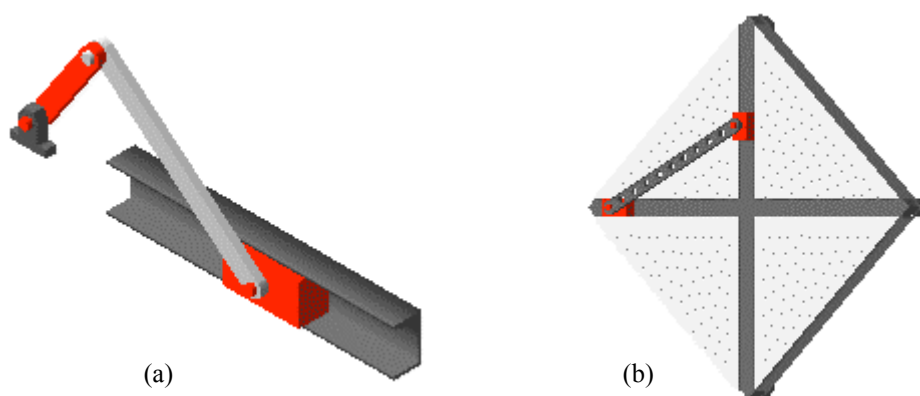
(a) Four-bar mechanism with one slider; the familiar piston-crank mechanism and (b) four-bar with two sliders and two pin-joints.
